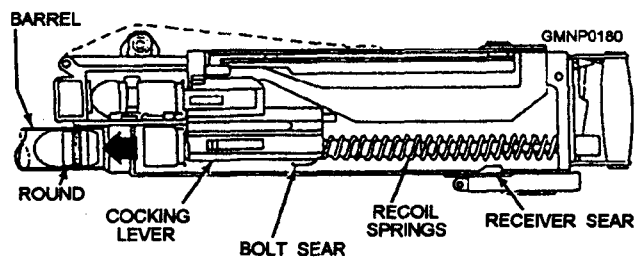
Mk 19 Mod 3 machine gun firing sequence.
